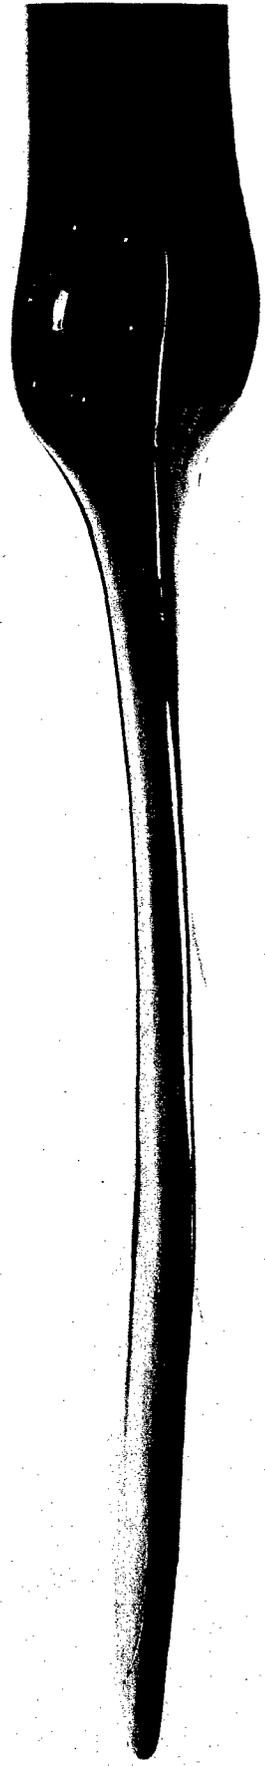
Edge View of Blade - Flottorp Standard Propeller
